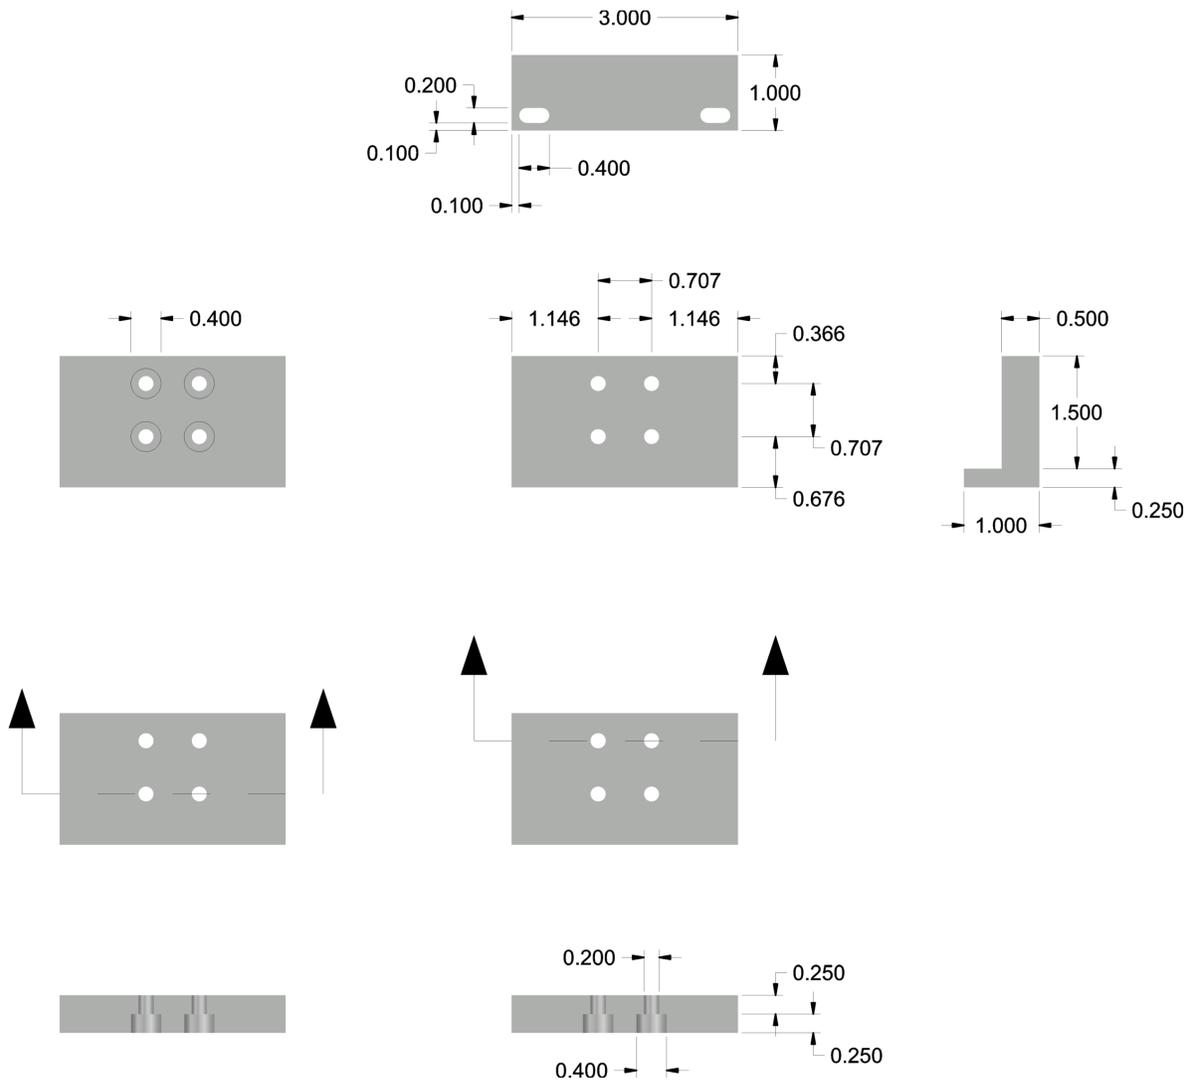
Orthographic drawings of mounting blocks for three-way pneumatic valves with bases perpendicular to panels
